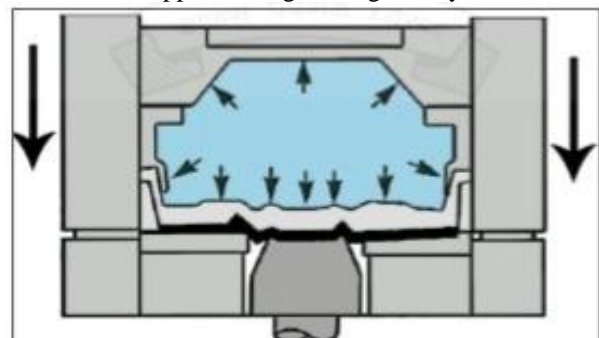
Schematic set-up of Hydroforming process of sheet metal parts [3]
